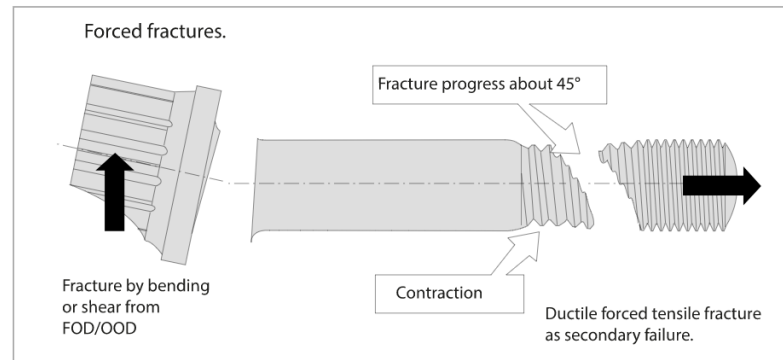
The fracture at the threads and fillet during engine operation [20]
